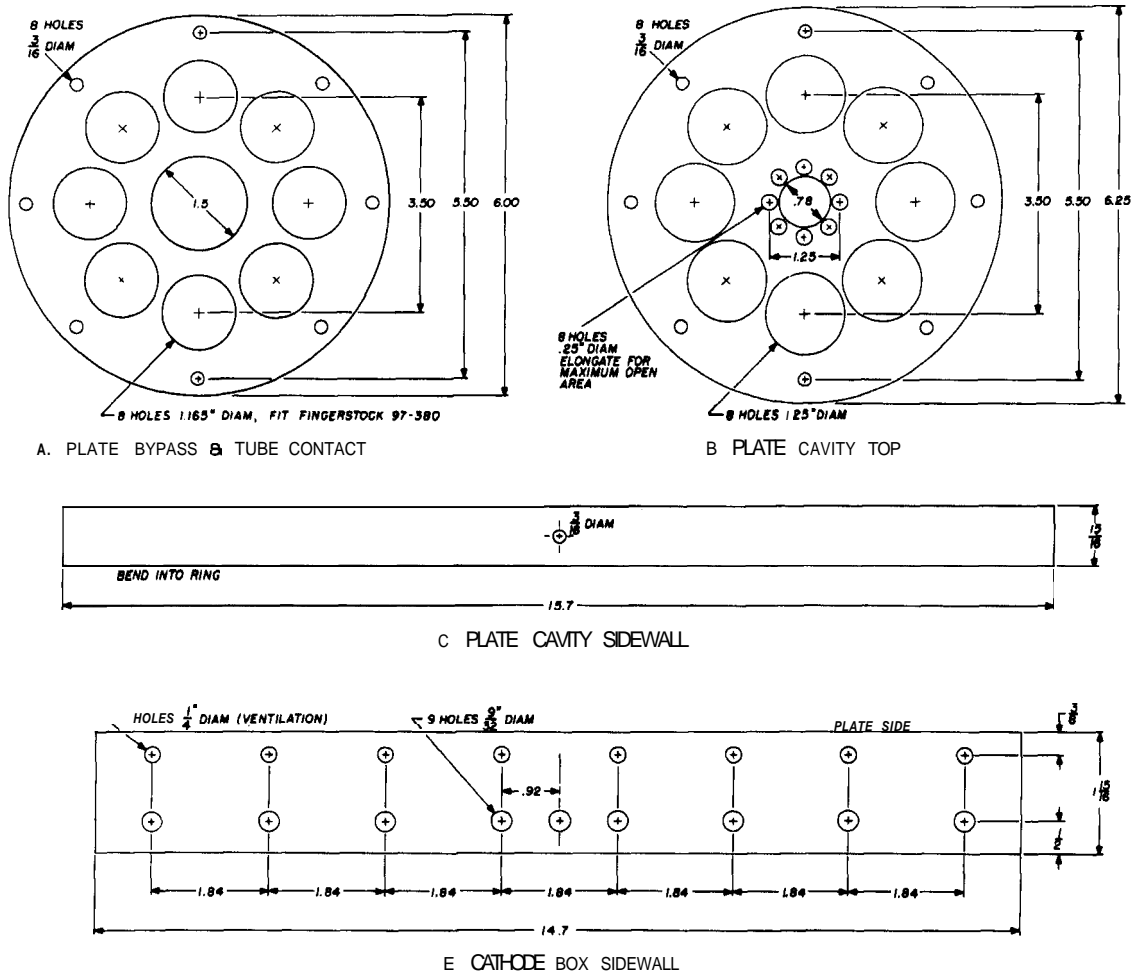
Mechanical parts of the high-power 1296-MHz linear amplifier. Material for all parts is .050" brass. Assembly of the parts is illustrated in fig. 5.
